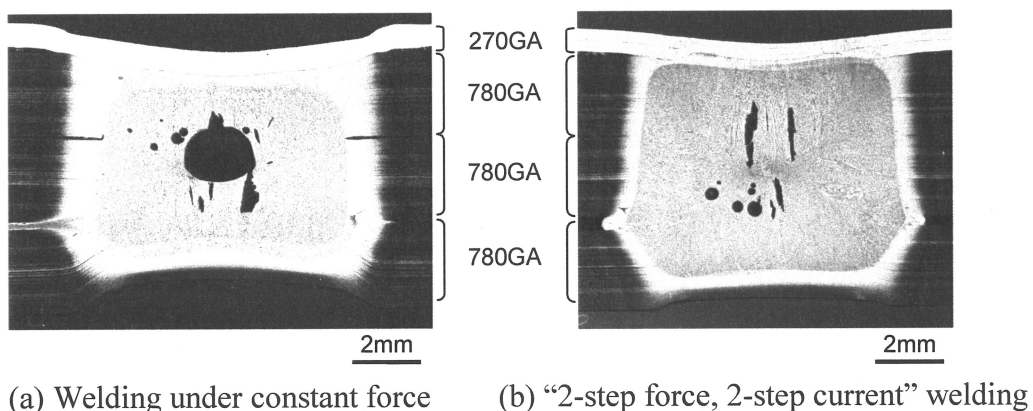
Cross-sectional macros of resistance spot weld of four sheet joint (sheet joint: 0.7mmt+2.3mmt+2.3mmt+2.3mmt; sheet thickness ratio: 10.9).
